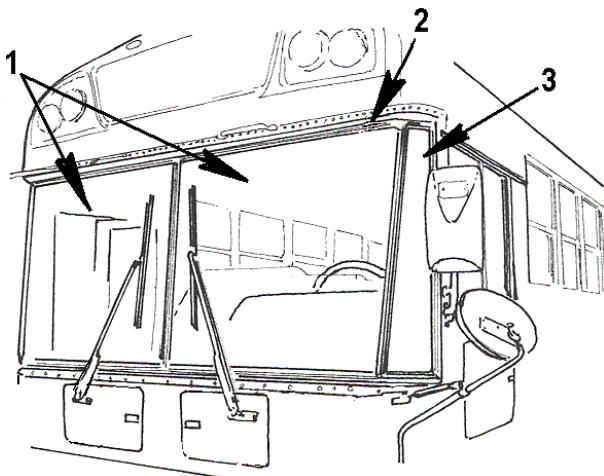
Windshield Wipers and Windshield Wiper Motor Access Panels
